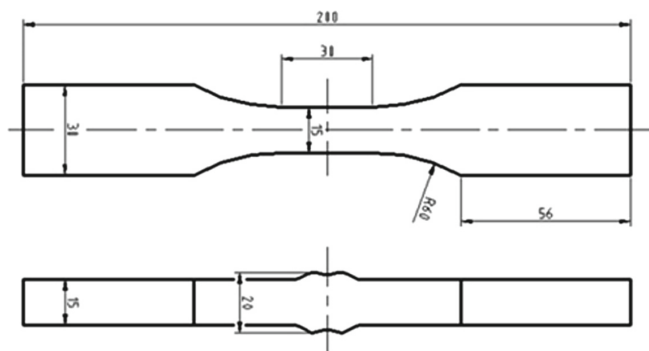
Shape and geometry of the HCF test specimens for butt welded joints (BWJ).
